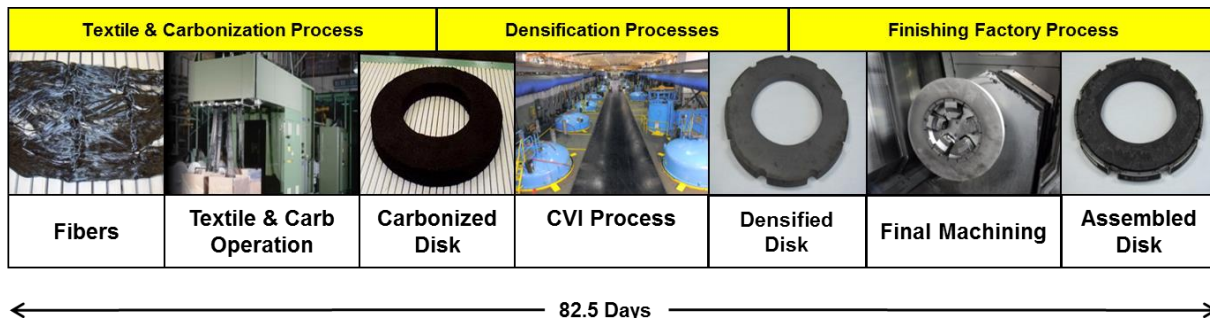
The Goodrich Carbon Brake Manufacturing Process
